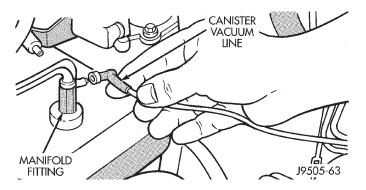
Canister Vacuum Line Location (At Manifold Fitting)
